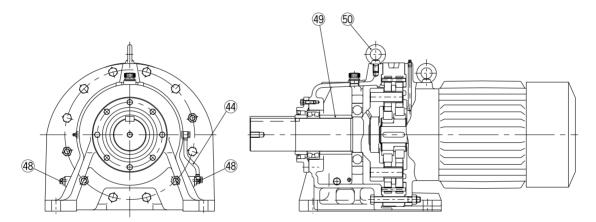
Type CHHM (Horizontal • Gearmotor), Single Reduction (Example: Frame size 6225)
